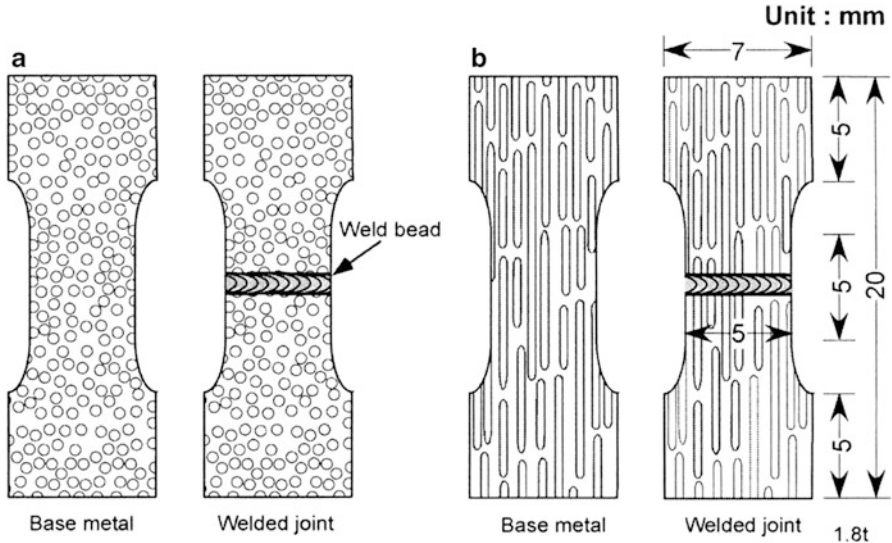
Geometry in the tensile test specimens of base metal and welded joint with the pores (a) perpendicular and (b) parallel to the specimen surface (Reprinted with permission from [9] © 2006 Elsevier B.V.)
